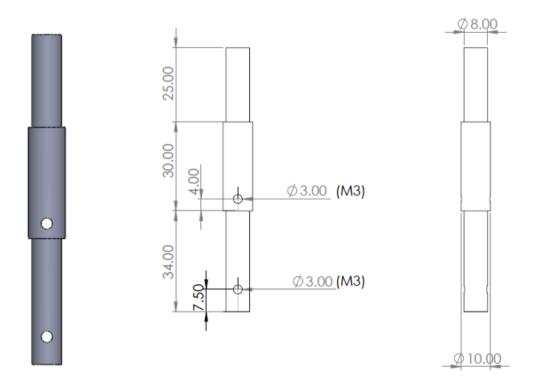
CAD model and dimensions of Arm 2 worm gear shaft
